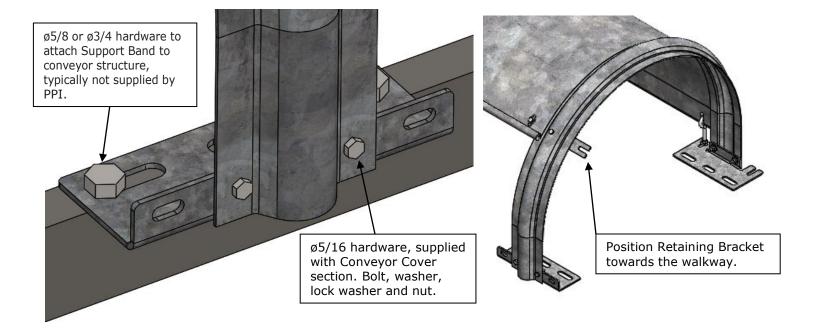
ATTACHING FOOT SUPPORT BRACKET 3/4 TO CONVEYOR STRUCTURE
